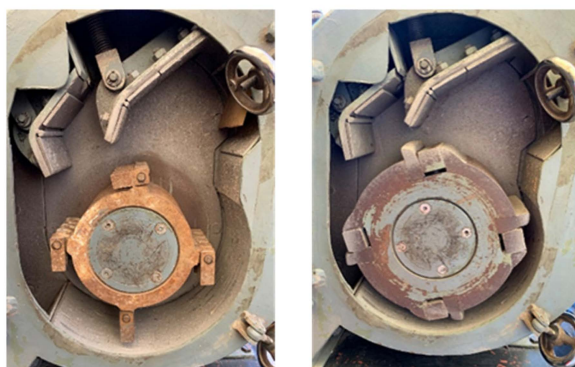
Inside view of the mill (left: hammer rotor; right: impact rotor).
